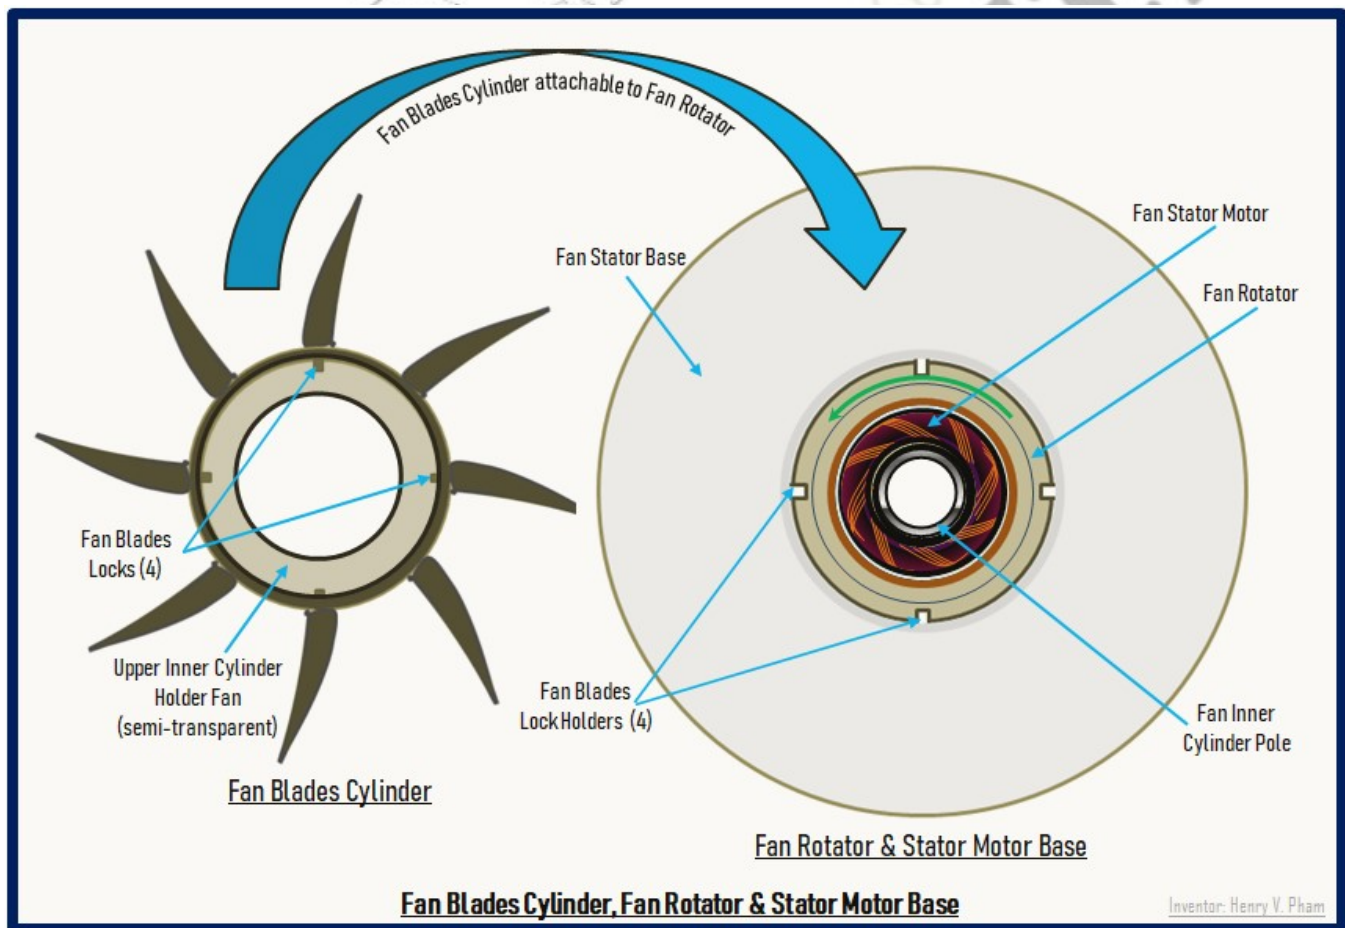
360° Stand G-Rotator Fan -Rotator Fan Blade & Motor
